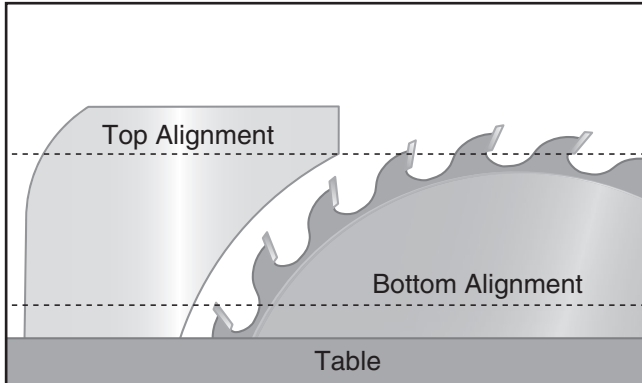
Checking the top and bottom riving knife parallelism with the blade.
